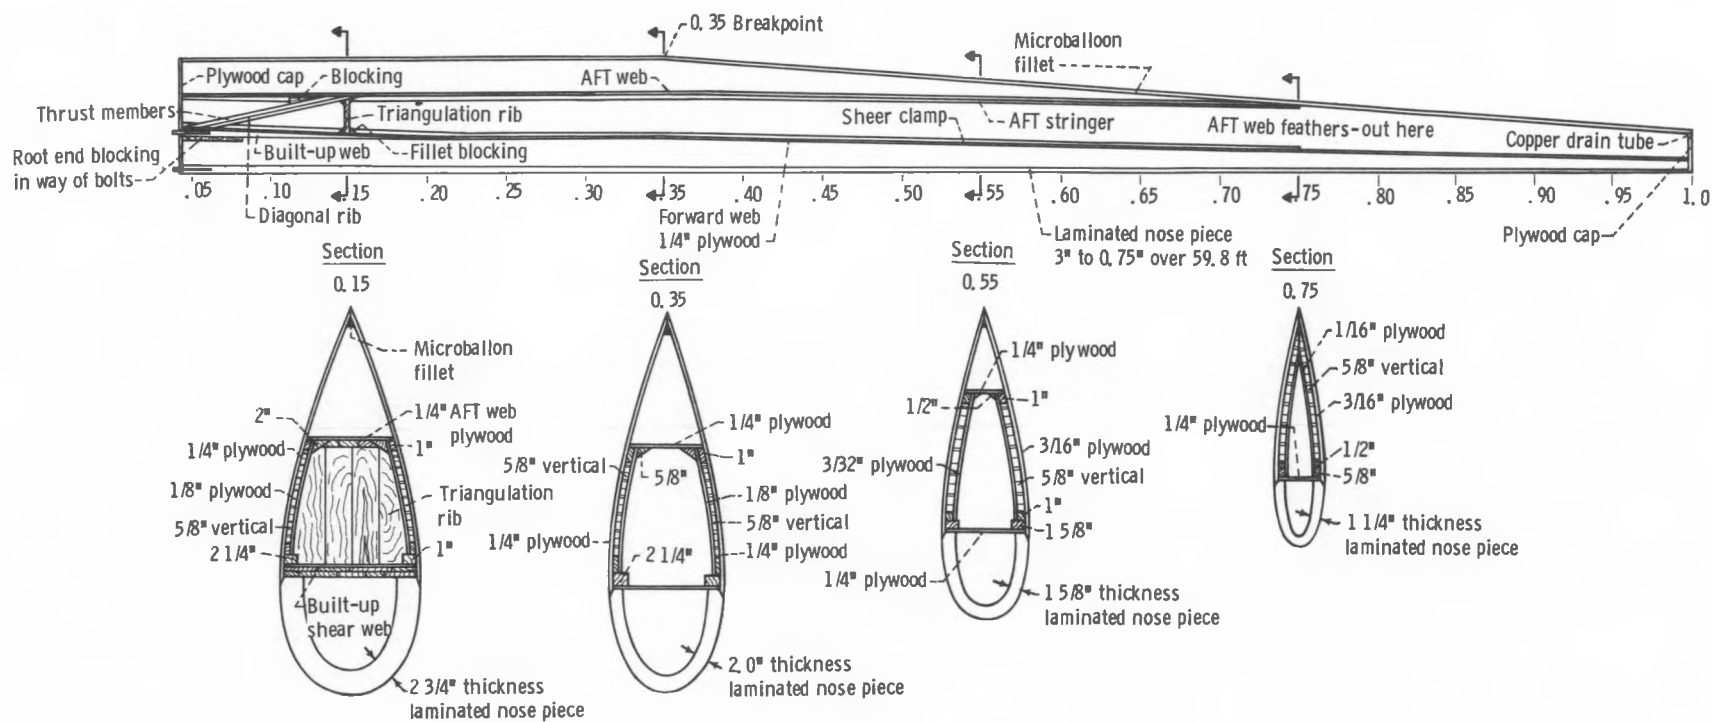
Detailed planform of Mod O laminated wood wind turbine blade design.
